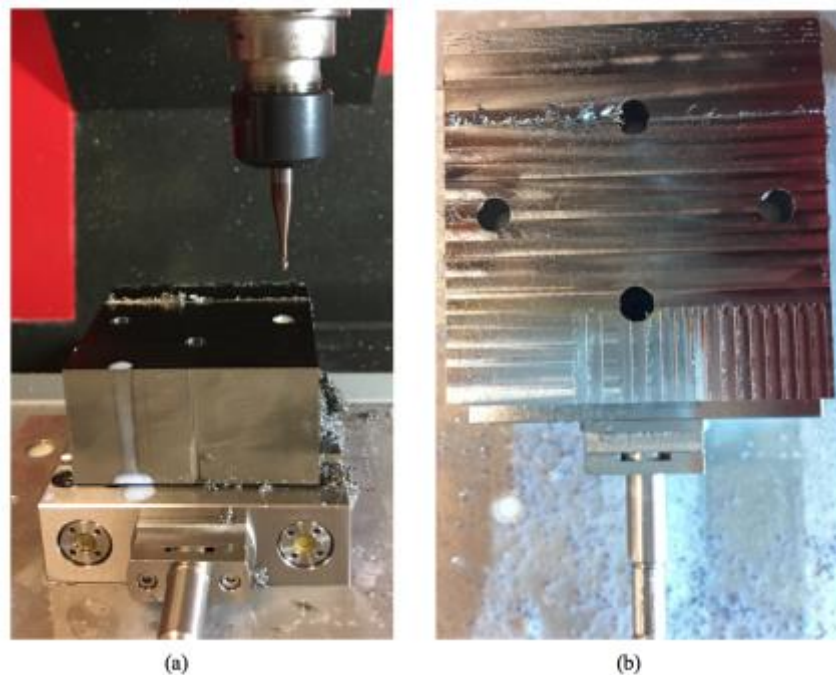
(a) Tool and Workpiece Setup, (b) Slot Milling Operation
